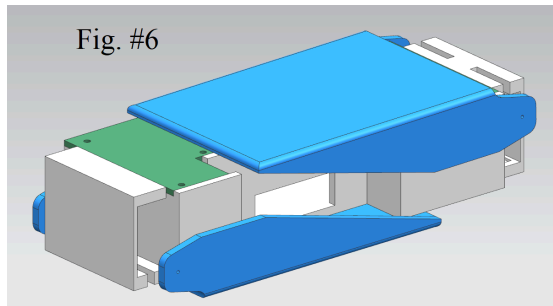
A 3D visual of the Case #2 closed assembly. Fig. #7: A 3D visual of the Case #2 open assembly.
